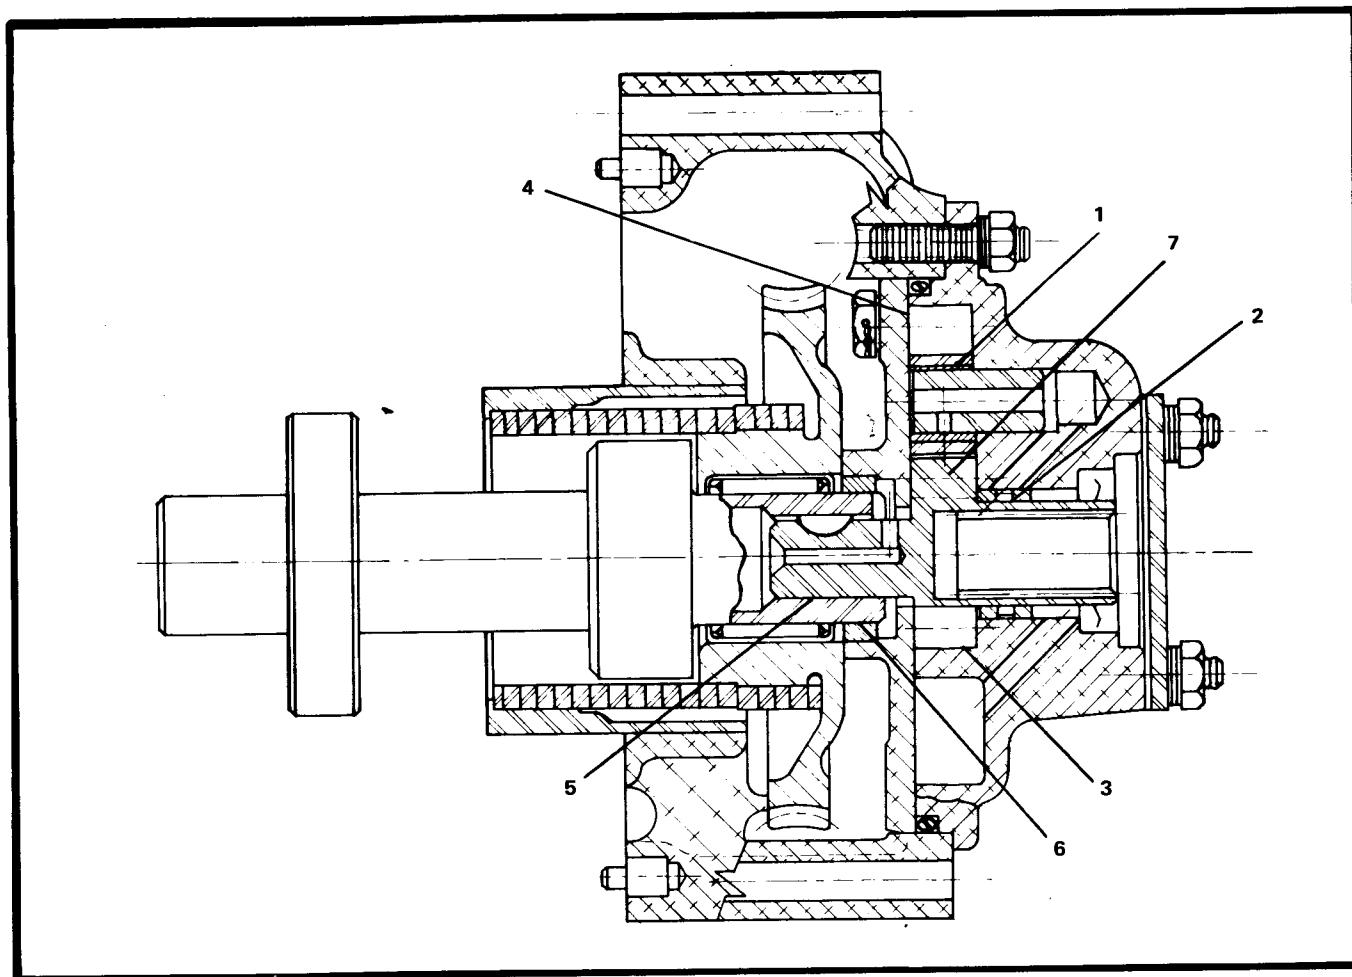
Starter Adapter & Accessory Drive Limits (TSIO-360B, C & D) (Refer to Table X).
